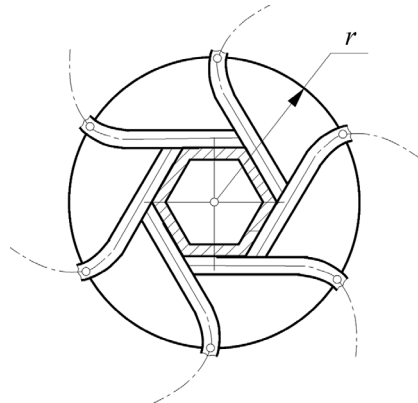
Possible variant to form a section with six blades fixed on a shaft in the form of a hexagonal tube
